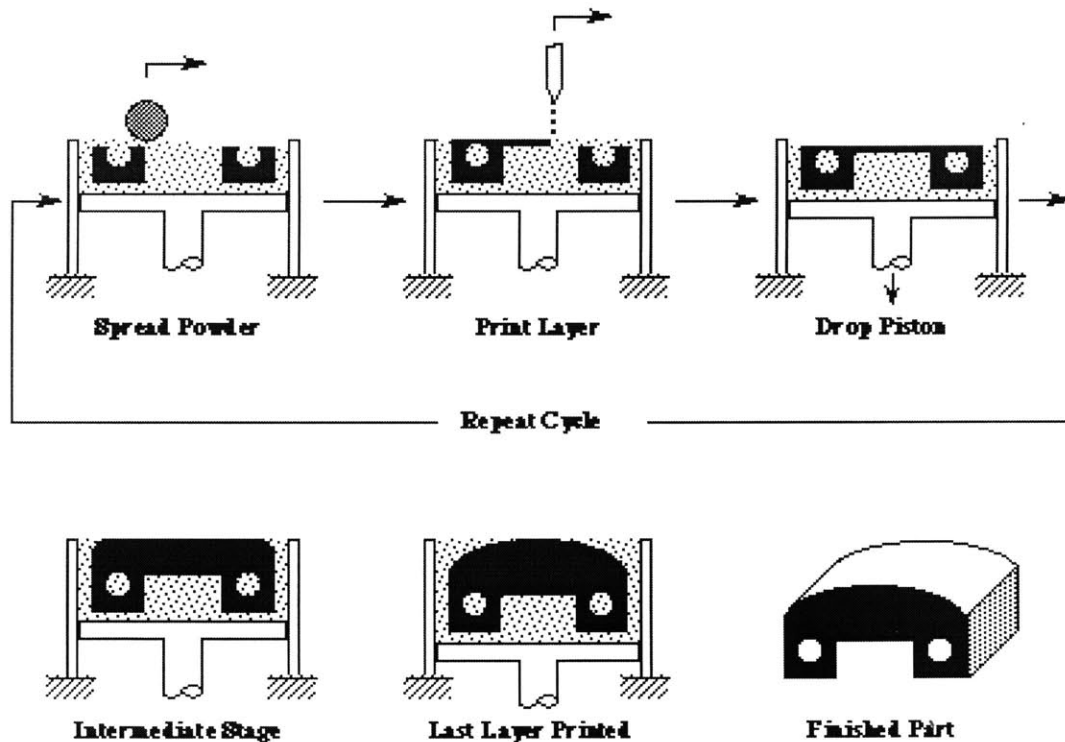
Schematic showing steps involved in the Three Dimensional Printing process.
